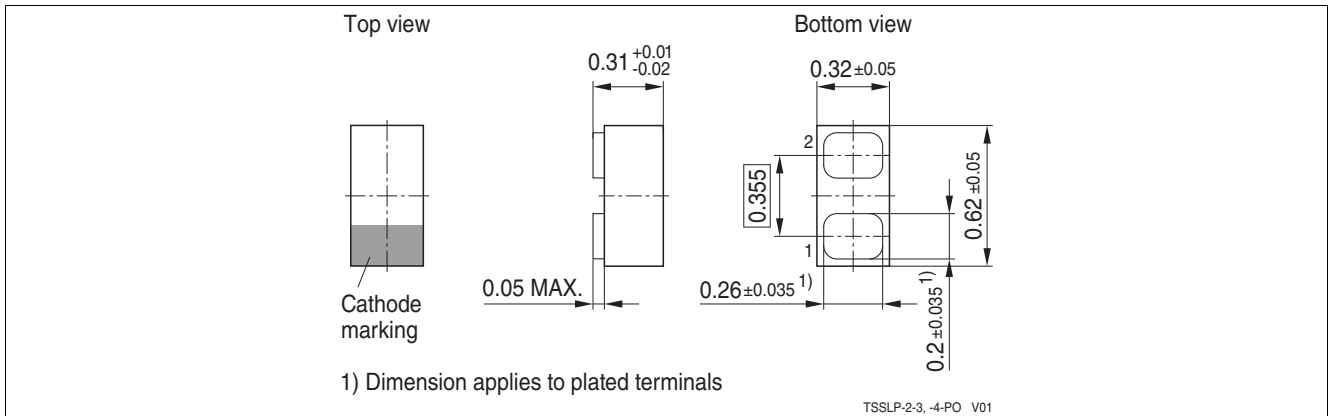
TSSLP-2-3: Package outline (dimension in mm)
